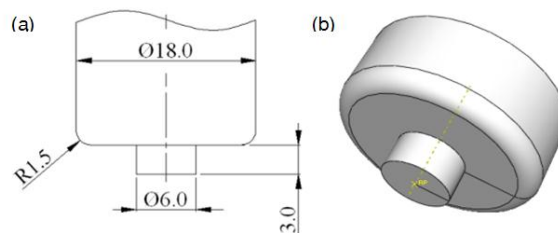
FSW welding tool geometry used for numerical analysis
